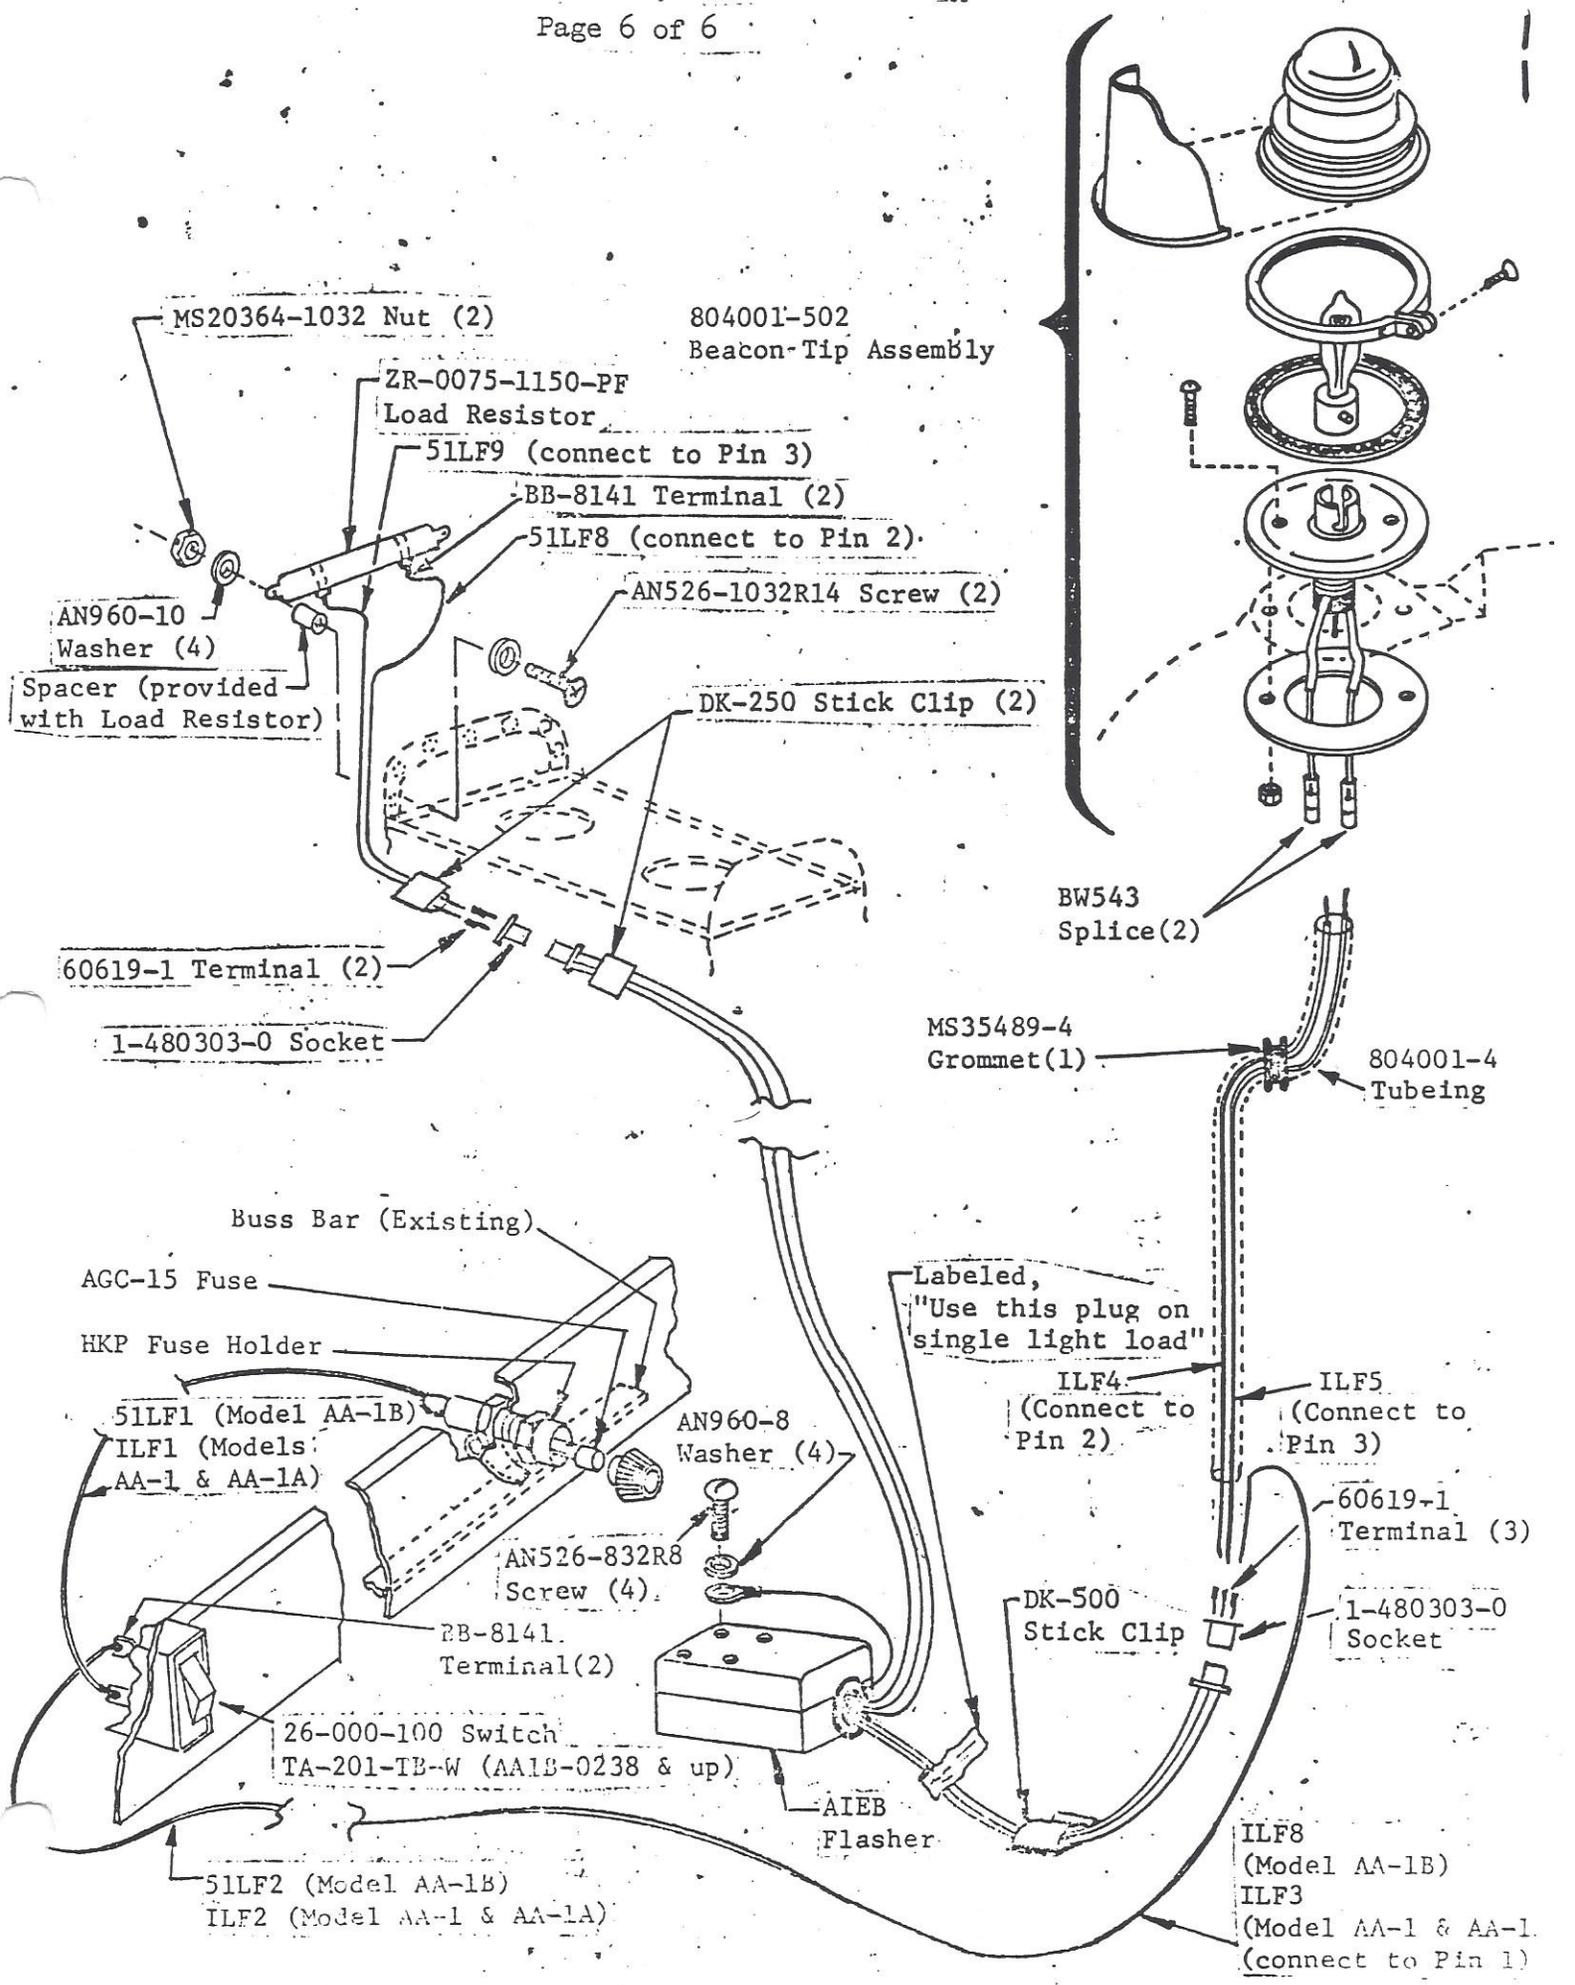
AIEB Flasher Unit, Load Resistor and Flashing Beacon Installation and Wiring
